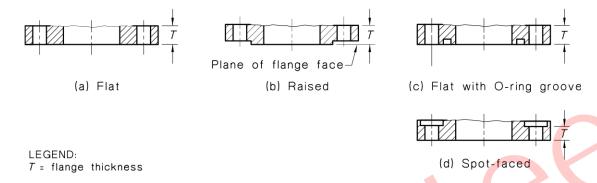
FLANGE FACE AND FLANGE THICKNESS
